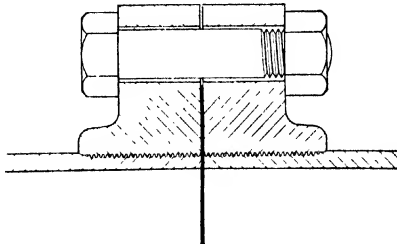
HEAVY SCREWED AND EXPANDED-ON FLANGE JOINT
